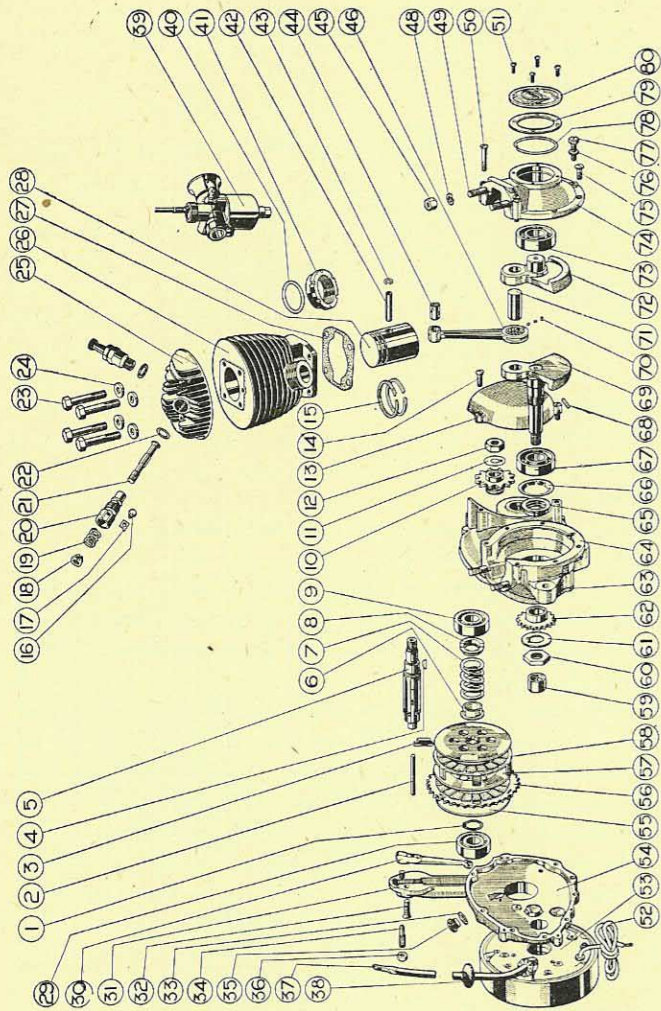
EXPLODED DRAWING OF THE MARK 2F UNIT.
